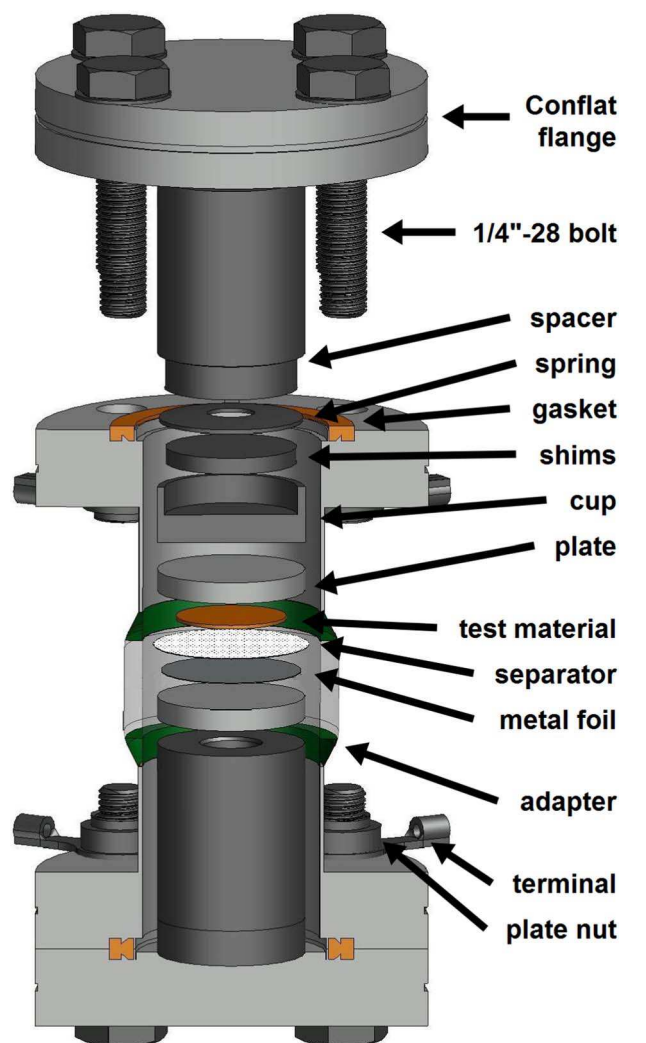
Exploded view of the cell assembly. Components are labeled and described in the text.
